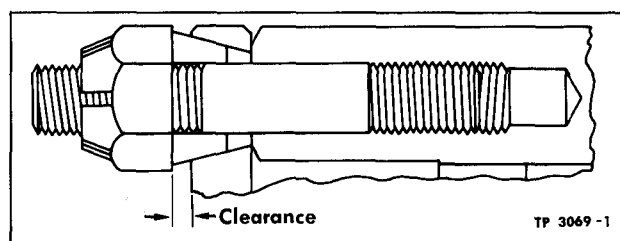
Clearance Between Axle Shaft Flange and Stud Nut
